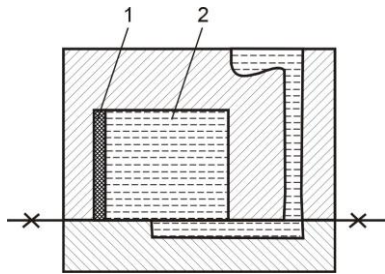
Forming of surface composite layers – founding method; 1 – composite premould (FeCrC); 2 – liquid metal (steel casting)
